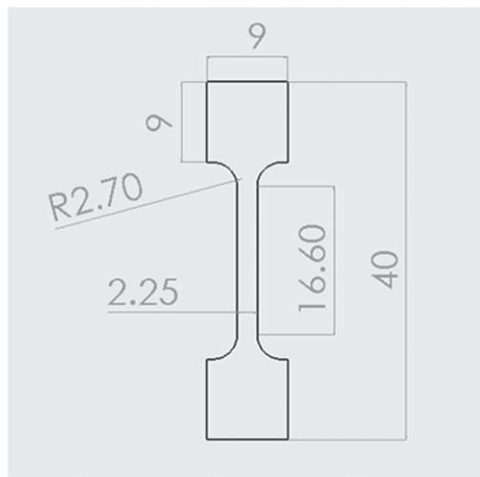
Tension test samples which were cut using WEDM (the dimensions were given in mm).
